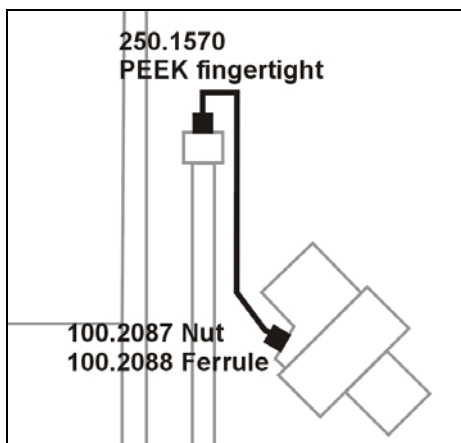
Assembly F: Connection between AS 100 – guard column.
